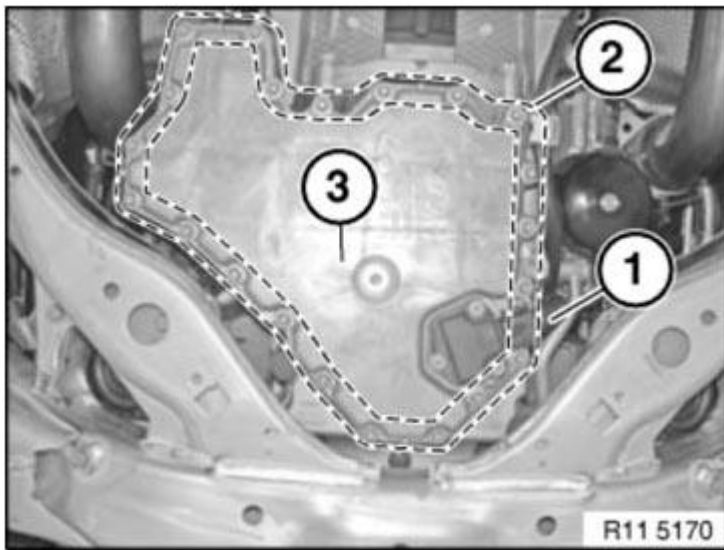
Identifying Plug Connection On Oil Level Sensor And Lower Oil Sump Section
